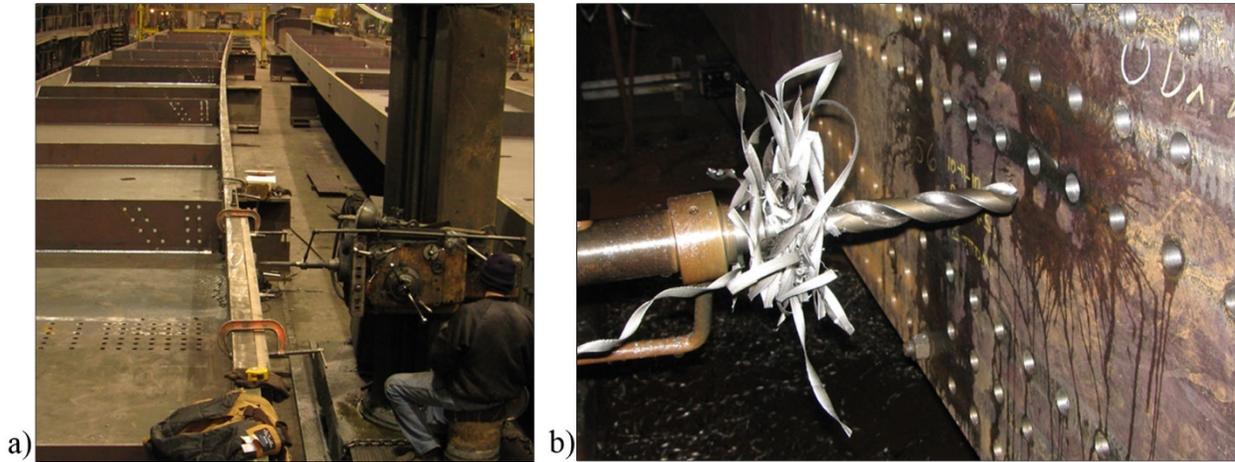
Match-Drilling: a) Girders Lay on Their Side and b) Web and Flanges Drilled Using Template
